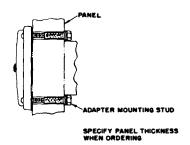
Adaptor mounting stud for Type AB-30 varmeters used on panels over 9/16" thick
